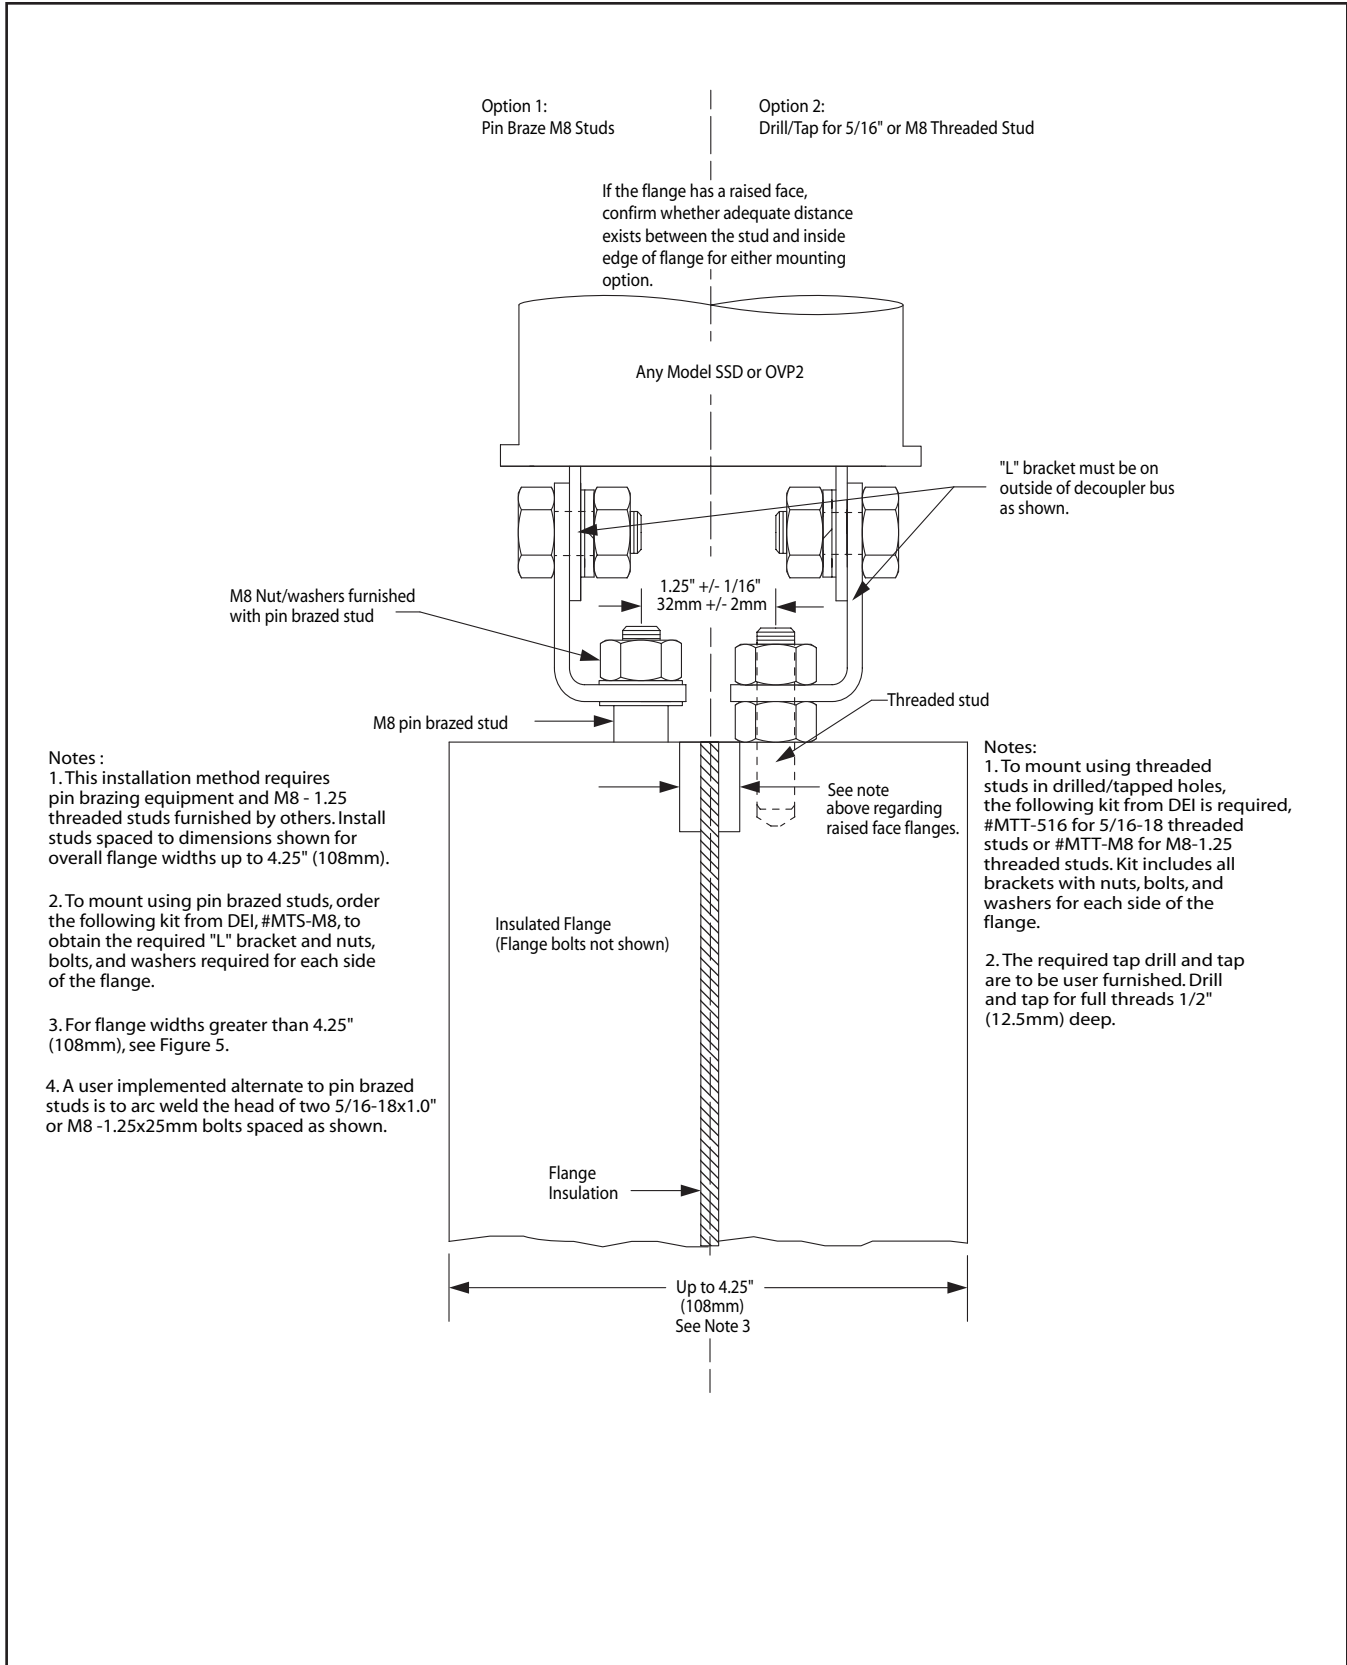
Flange Mount Using Tapped Holes or Pin Brazed Studs
